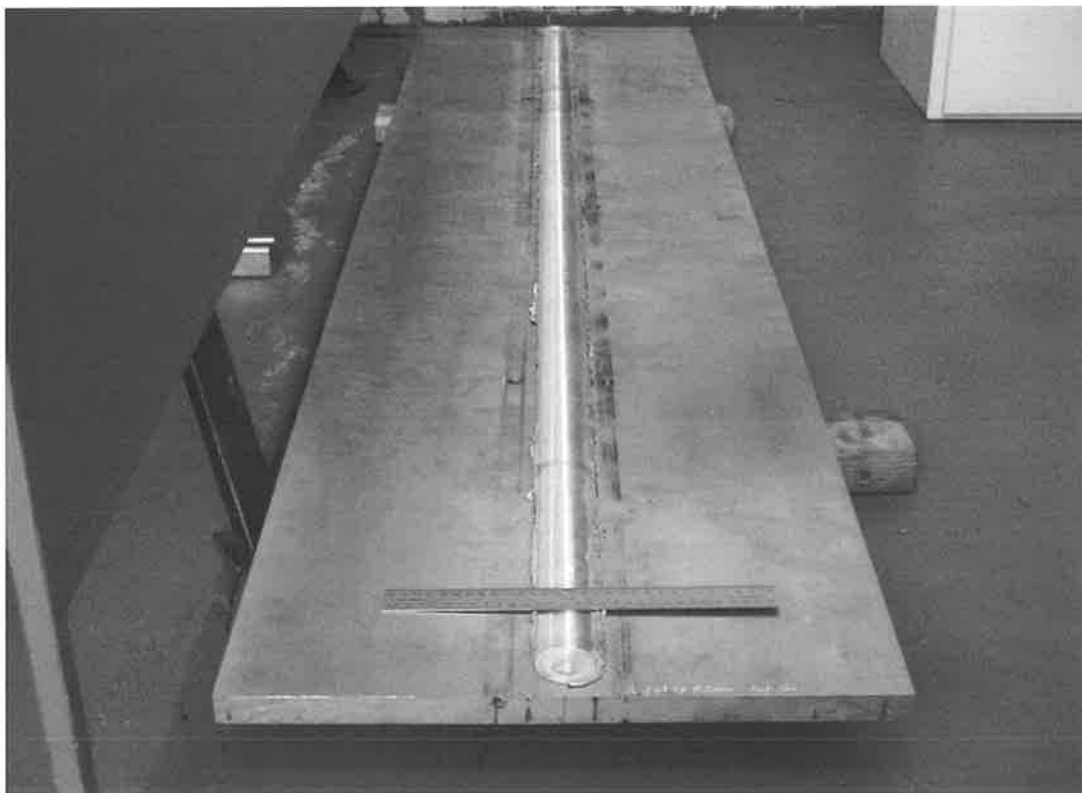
No volumetric defect was evident as viewed from the exit hole, weld 716A.
